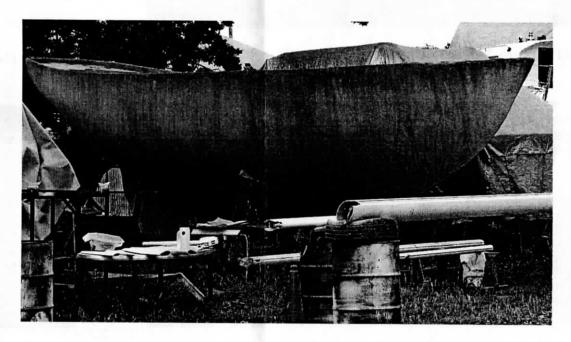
Sampson Seabird, 36 ft ferro cement sailing yacht
